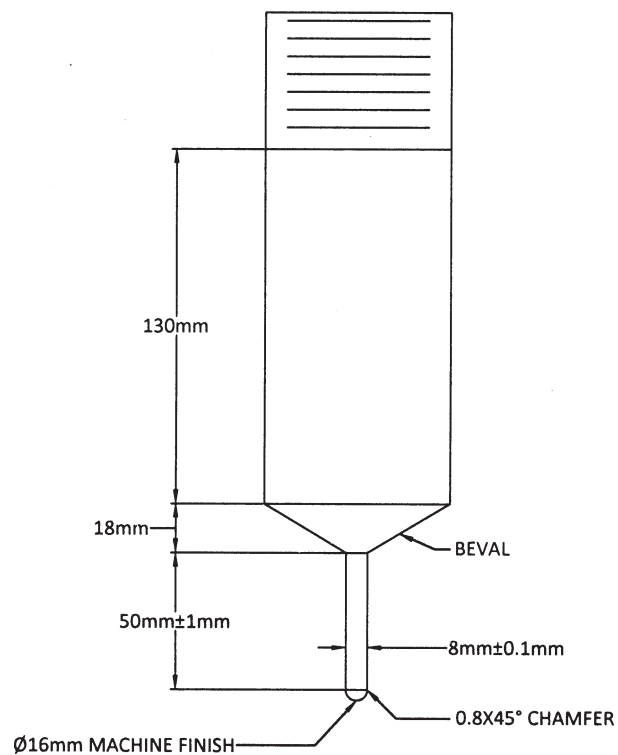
TEST PROBE DETAIL (NOT TO SCALE)
